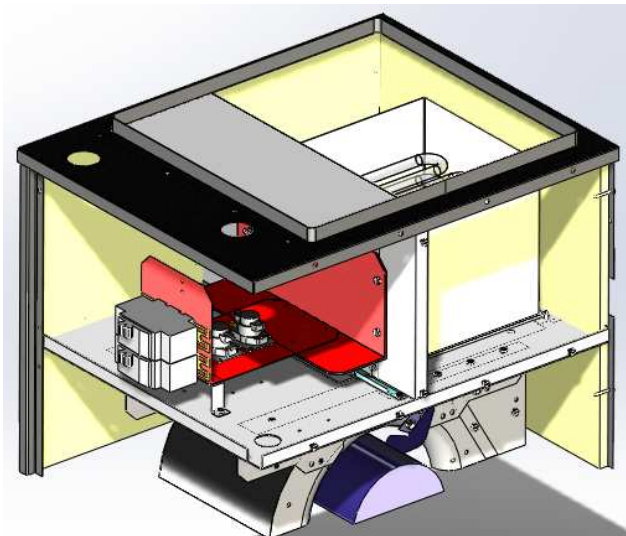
Heater Accessory Installed (right side and heater access panels not shown)
